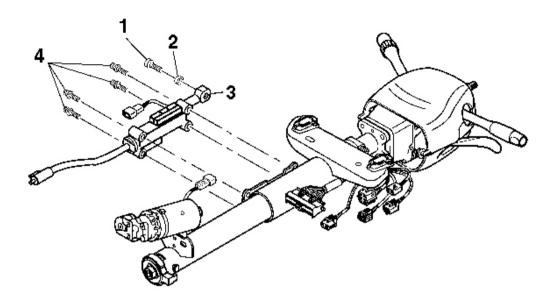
Telescope Actuator Assembly, Ball & Telescope Drive Bolt Courtesy of GENERAL MOTORS CORP.
